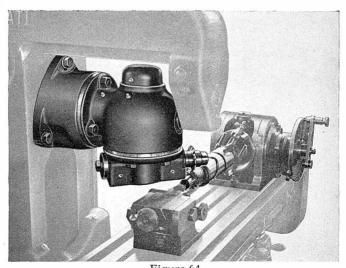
Universal Spiral Milling Attachment and Dividing Head Set Up for Milling the Helical Gear Teeth on a Cam Shaft
